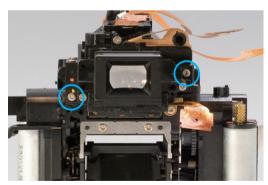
Position of Eyepiece Ass'y Screws (Back)
